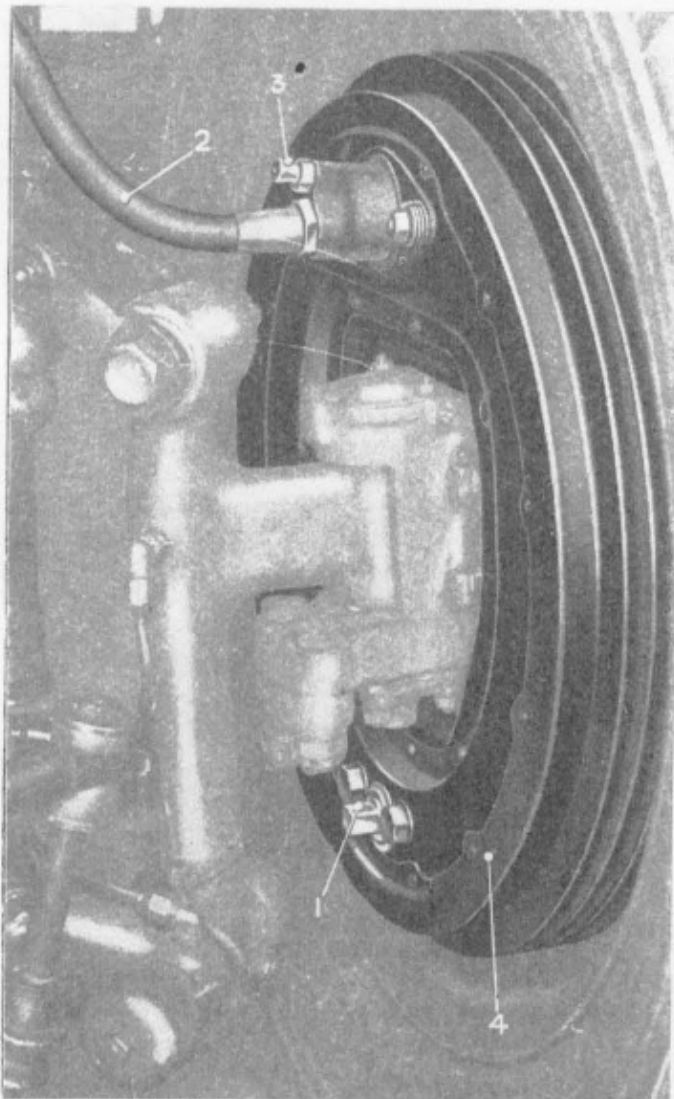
FRONT BRAKE ADJUSTMENT.
